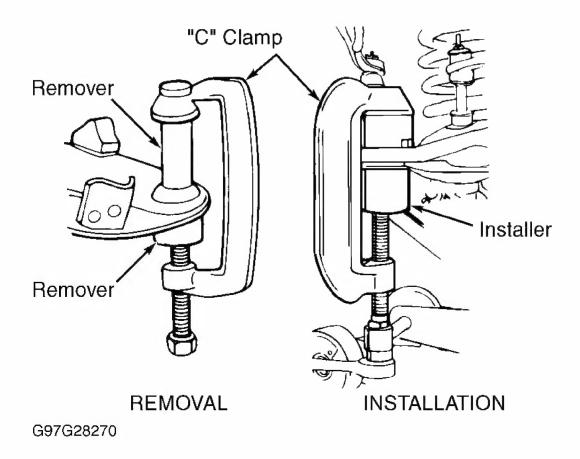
Removing & Installing Lower Control Arm Ball Joint Courtesy of GENERAL MOTORS CORP.
